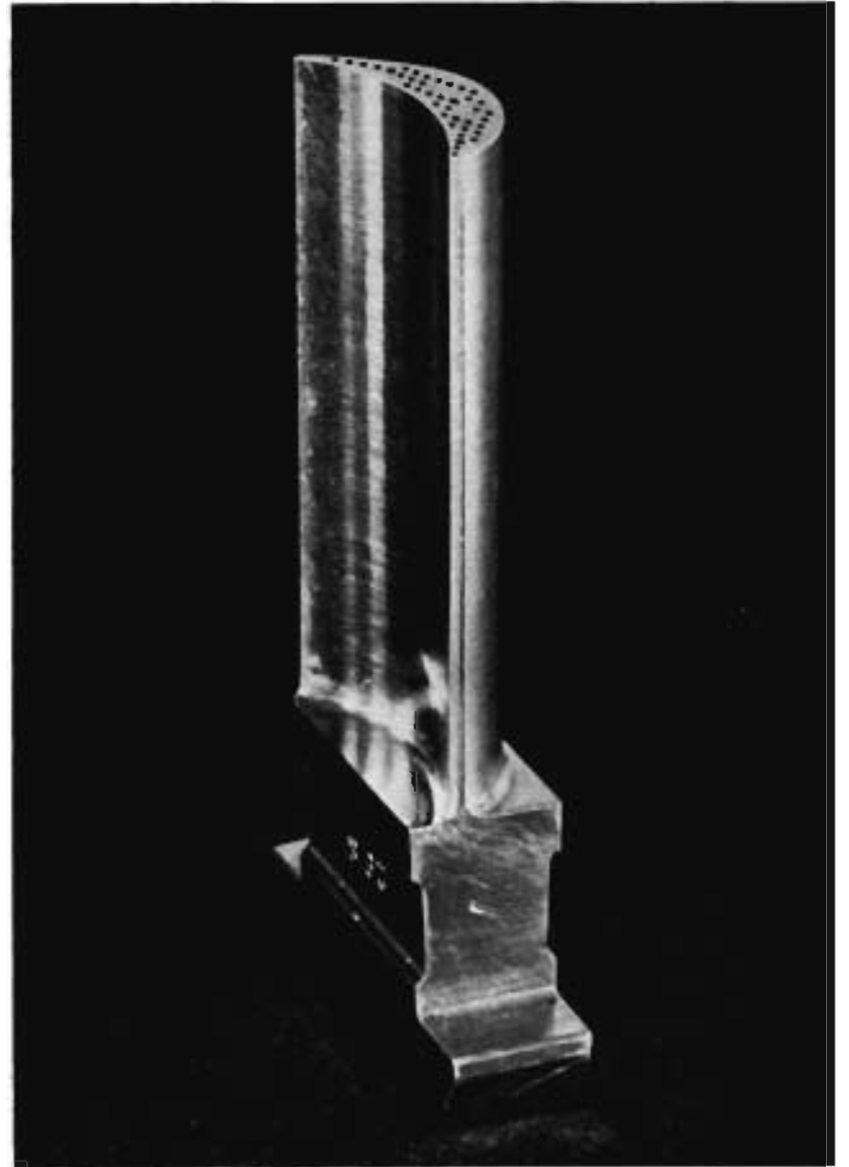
Air-cooled rotor blade (A.C.I.R.).
